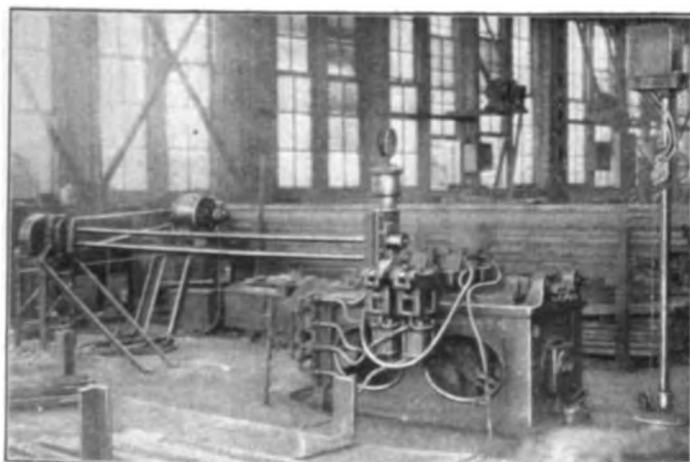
BACK VIEW OF ELECTRIC WELDER
